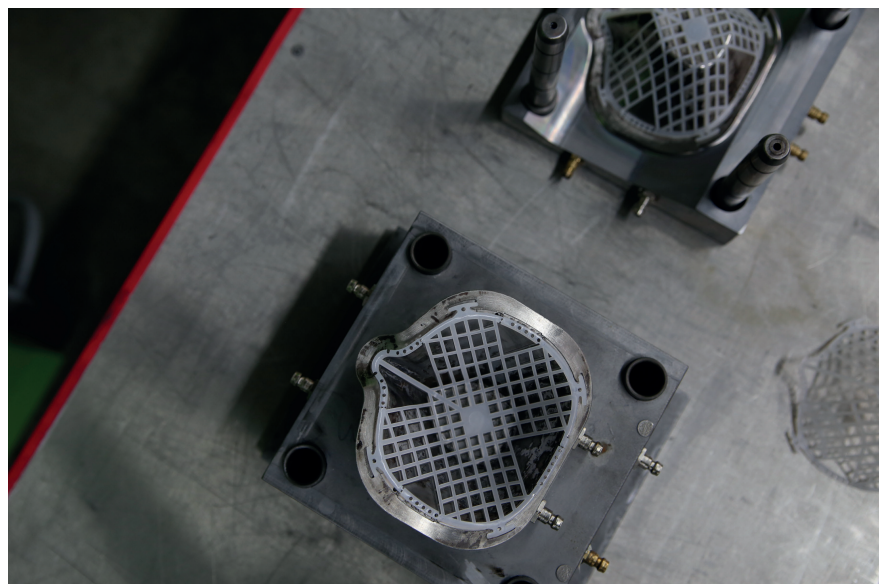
Filter basket of PE in the injection mold, with a mold insert manufactured by laser melting
